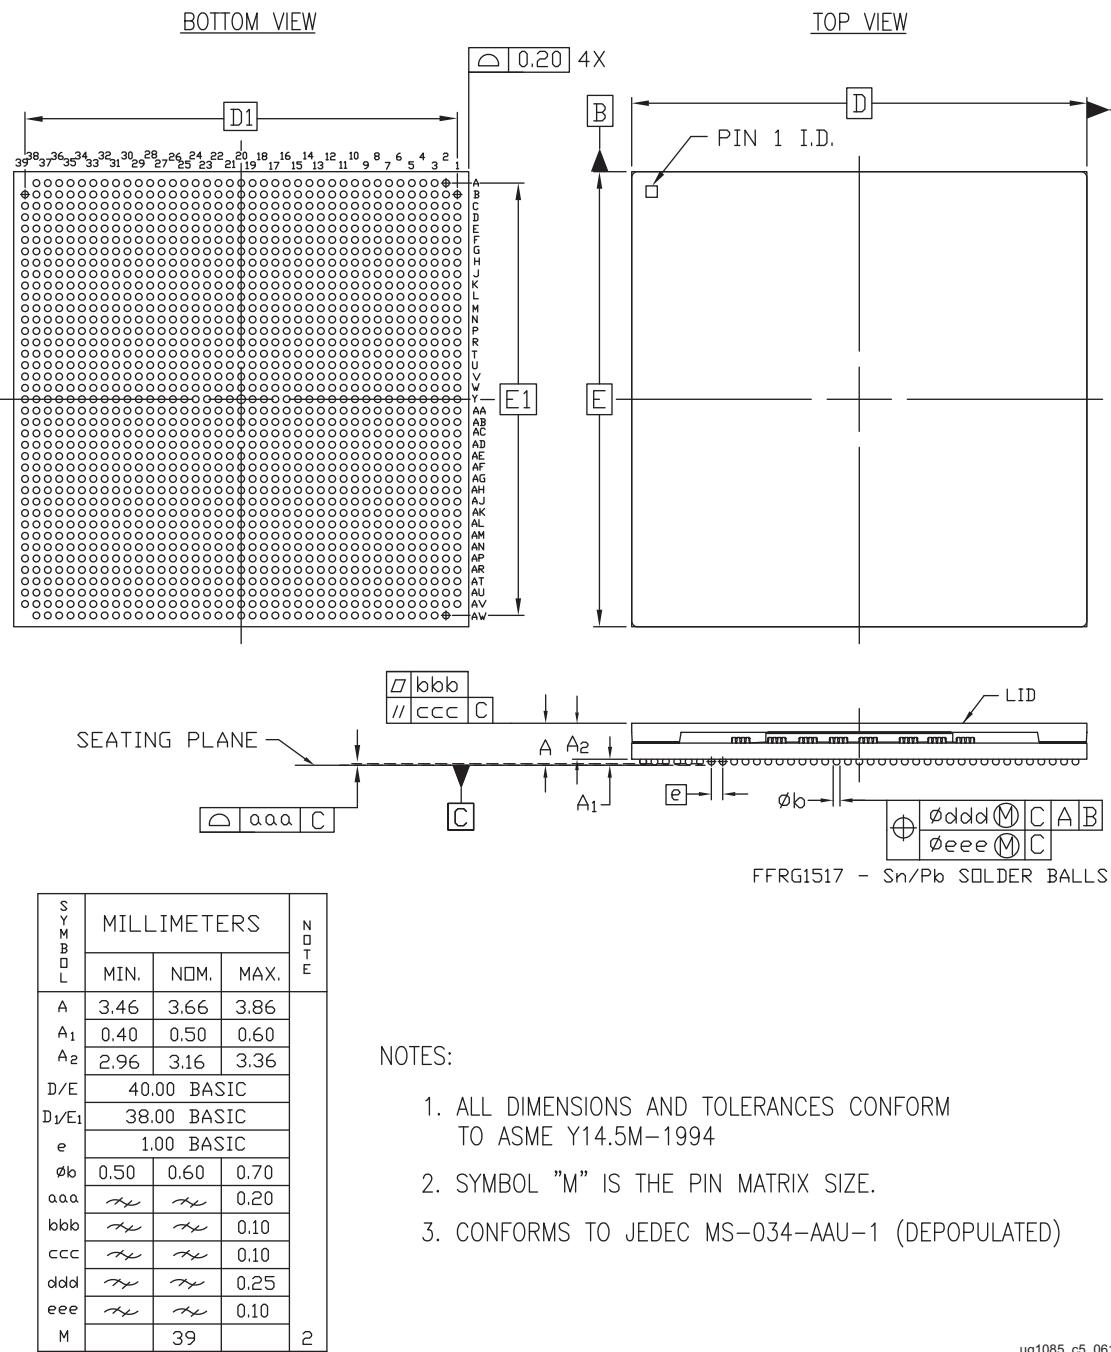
Package Dimensions for FFRG1517 (XQZU28DR)
